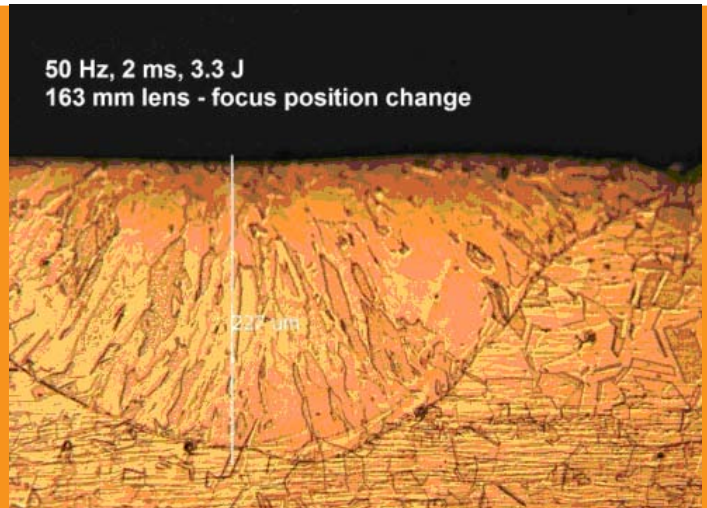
Transverse section of bead-on-plate weld on 304 stainless steel
